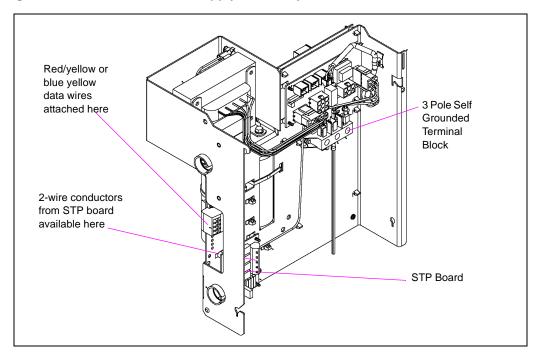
M00458A00X Power Supply Assembly with Cover Removed
